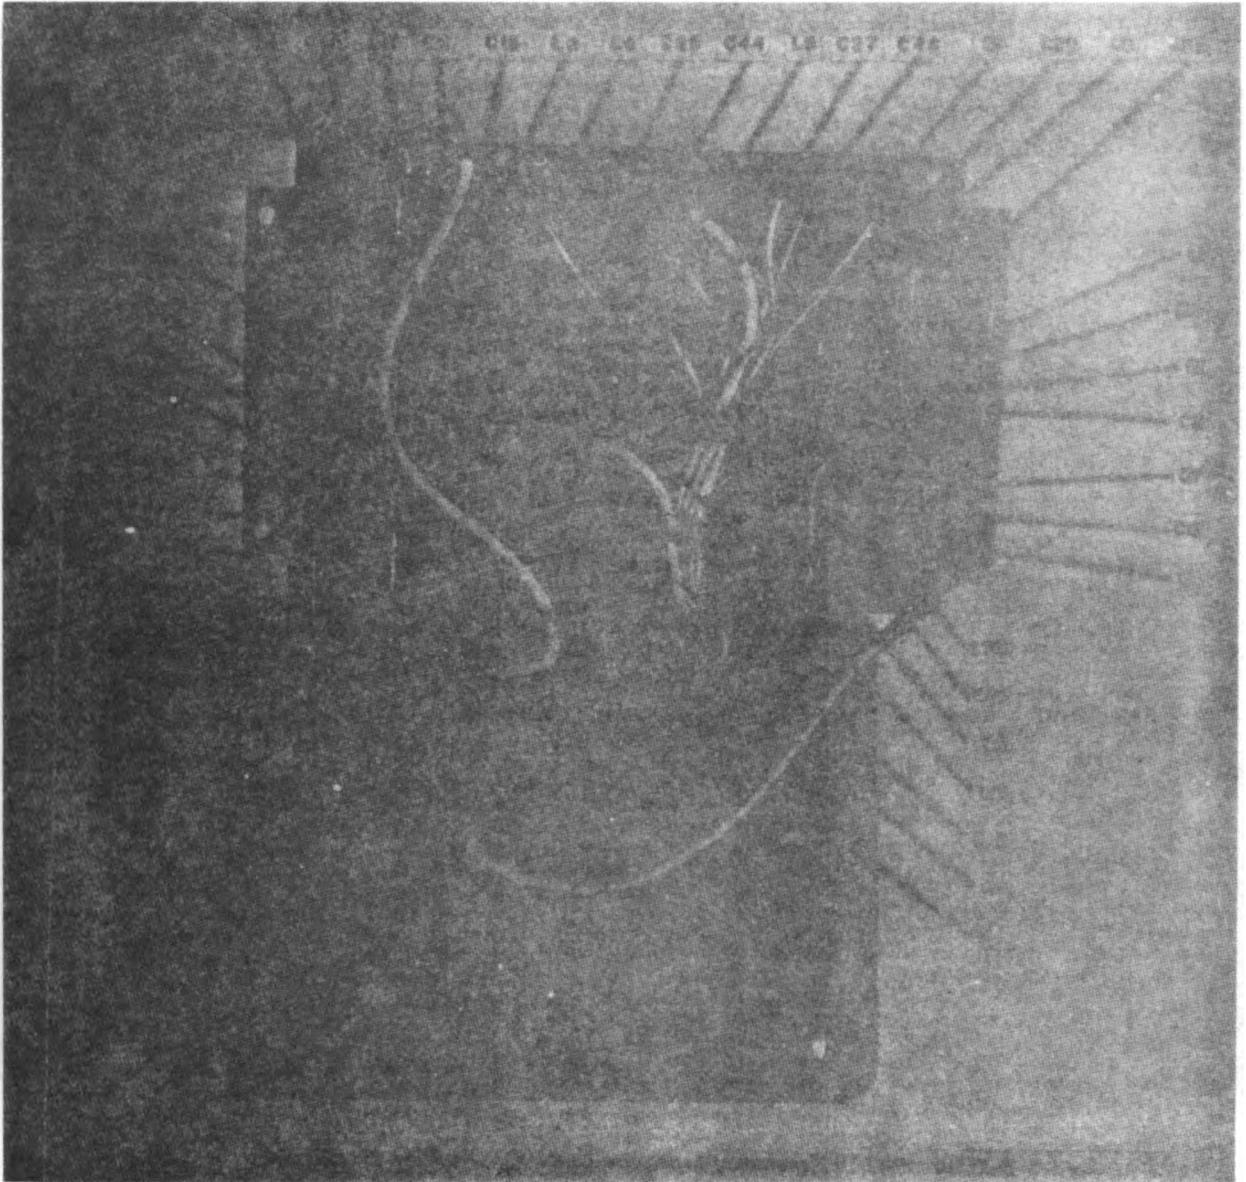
Ⓞ. IF Audio module, rear view, component boards removed (part 2 of 2).
